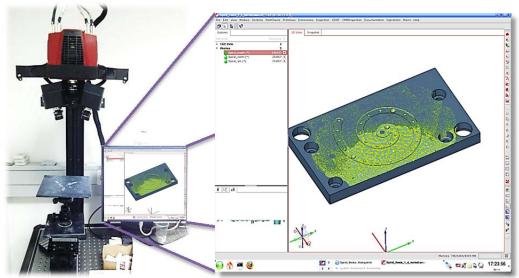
Three-dimensional scanner and spiral plate dimensional inspection
